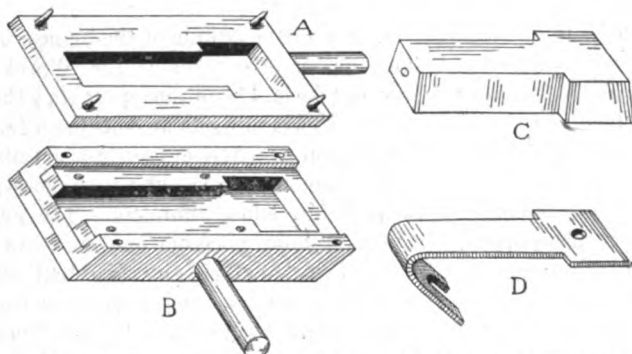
TOOLS USED TO ECONOMIZE TIME IN MAKING A LOCOMOTIVE BRAKE SHOE SPRING.
